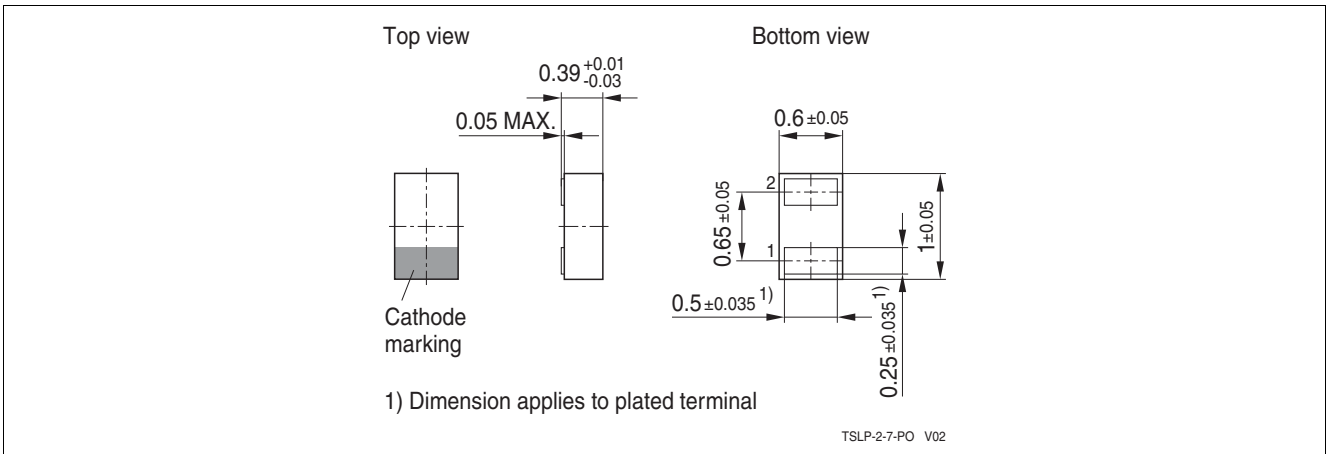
TSLP-2-17 Package outline (dimension in mm)
